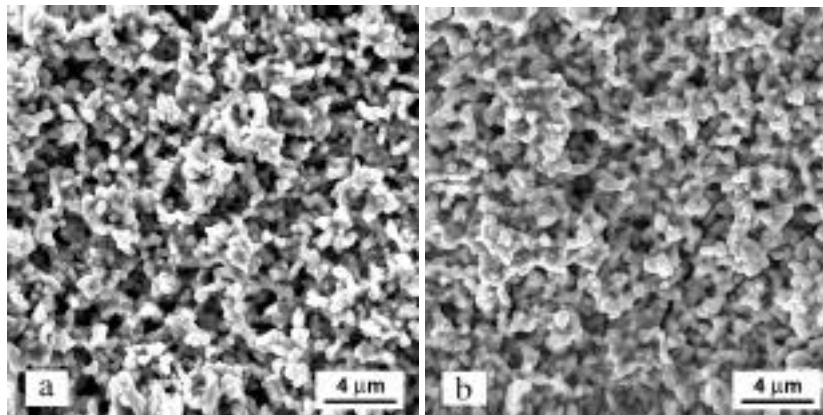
Details of the fracture surfaces (a) on ODS-Fe₃Al side, and (b) on Haynes 230 side, showing that both have the same structure
